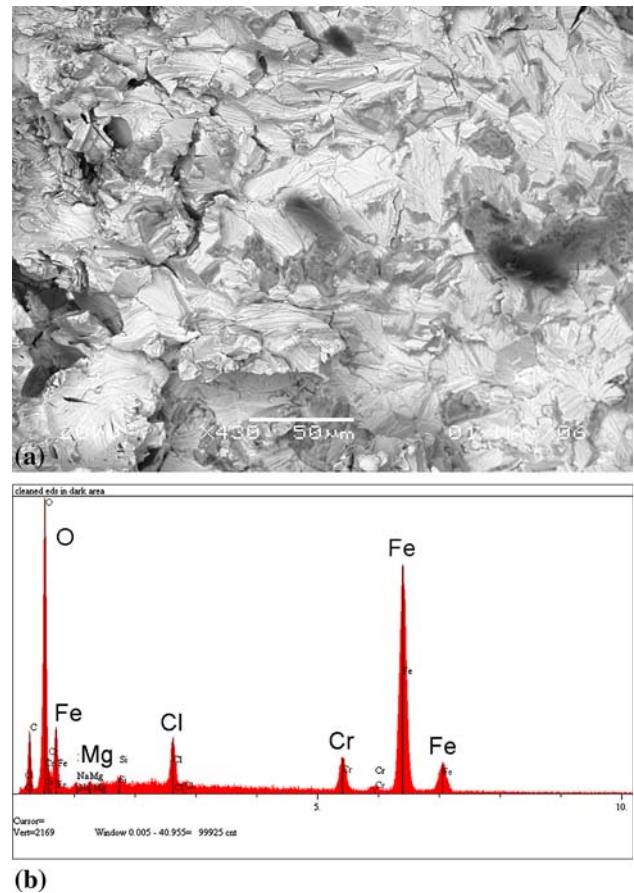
Photograph of fresh fracture surface generated by breaking open along pre-existing cracks in hanger (Fracture B–B', shown in Fig. 2)
